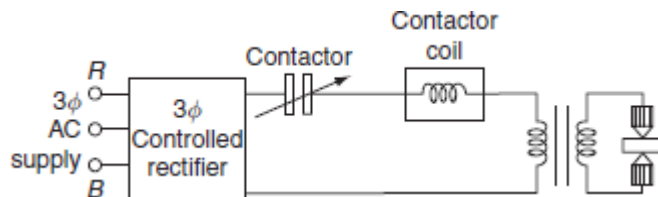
Magnetic energy storage welding circuit
